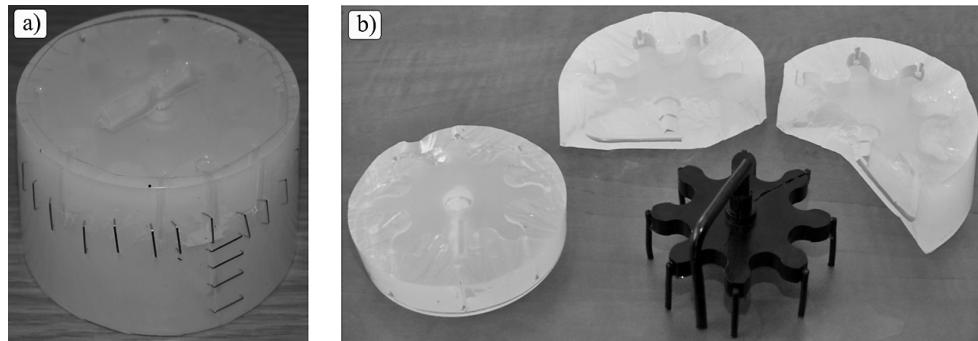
Gear wheel prototype manufacturing: a) closed silicone mold, b) cast prototype made of UP composition removed from the mold and open silicone mold visible beside
